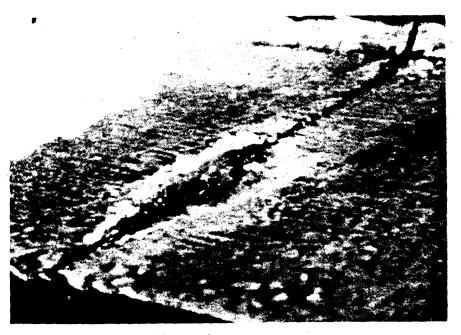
Poor Longitudinal Stiffener Weld
